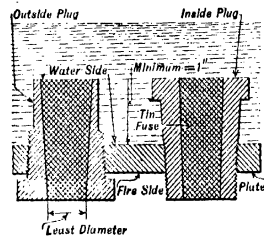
Outside and Inside Types of Fusible Plugs.
